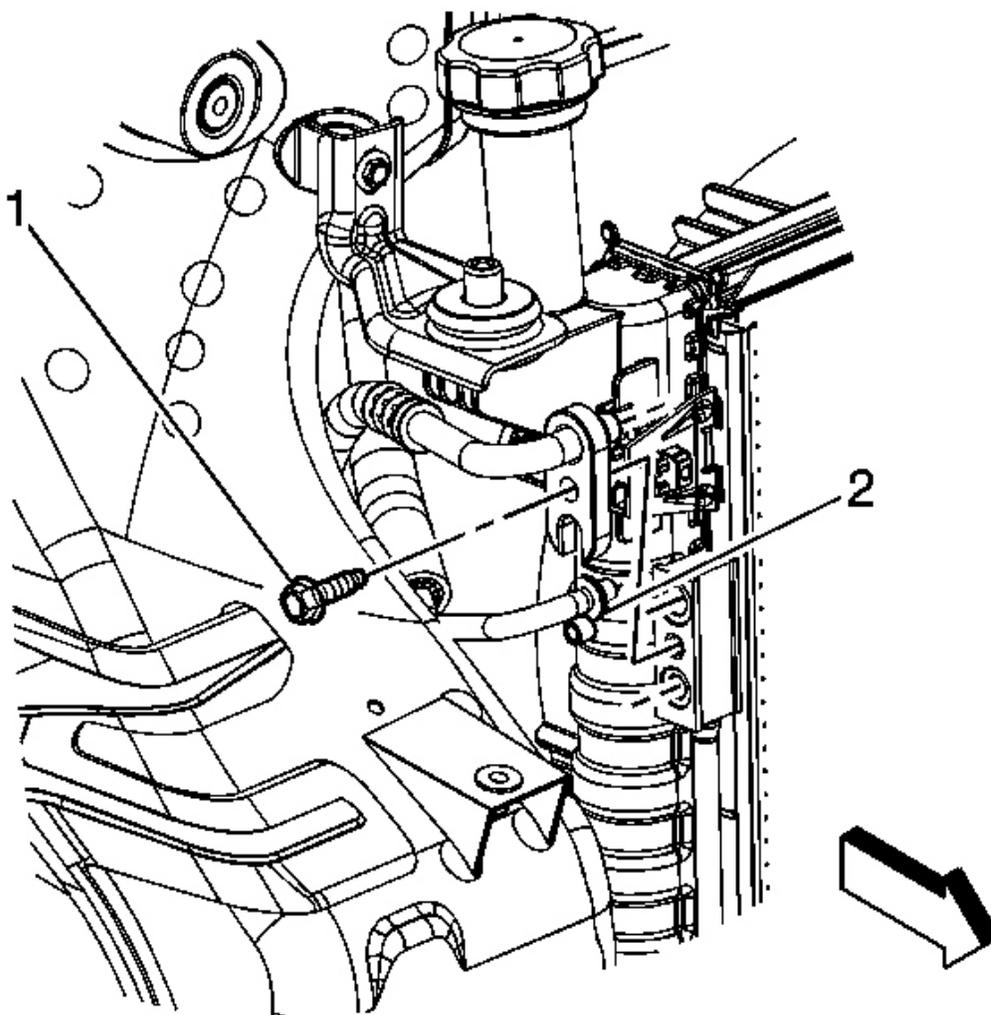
Identifying A/C Condenser & Liquid Line Bolt
